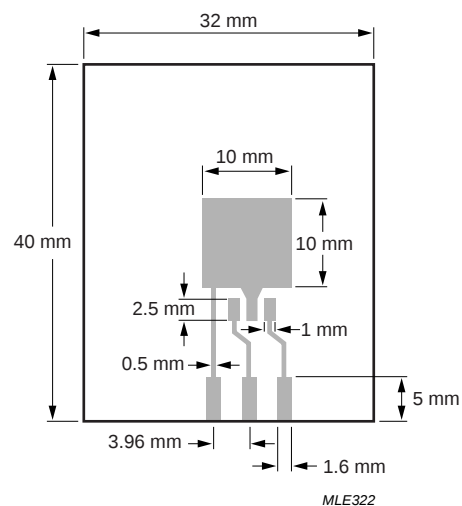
FR4, mounting pad for collector 1 cm<sup>2</sup>.
